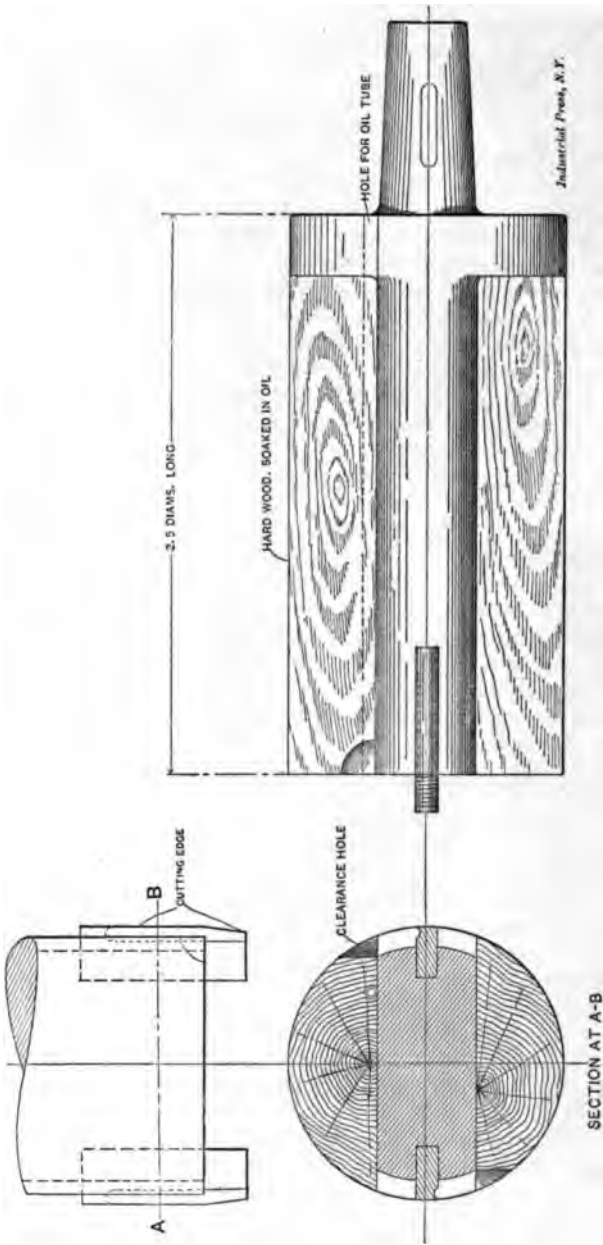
Finishing Tool for Reaming Holes of from Three to Six Inches in Diameter
